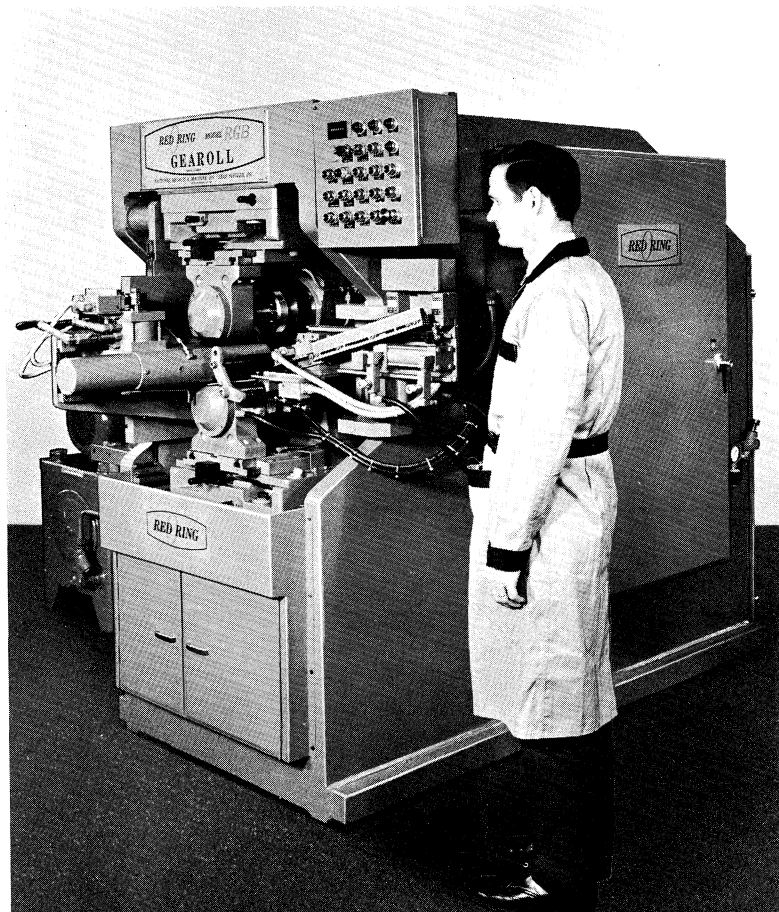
The Model RGB GearRoll that rough-rolls or finish-rolls gear teeth in high production.
